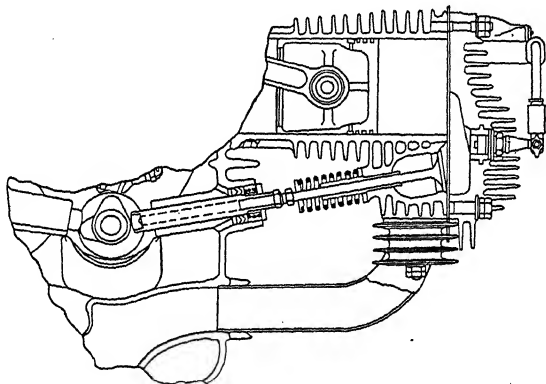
Arrangement of the valve gear used on the Continental A-40 L-head engine.
